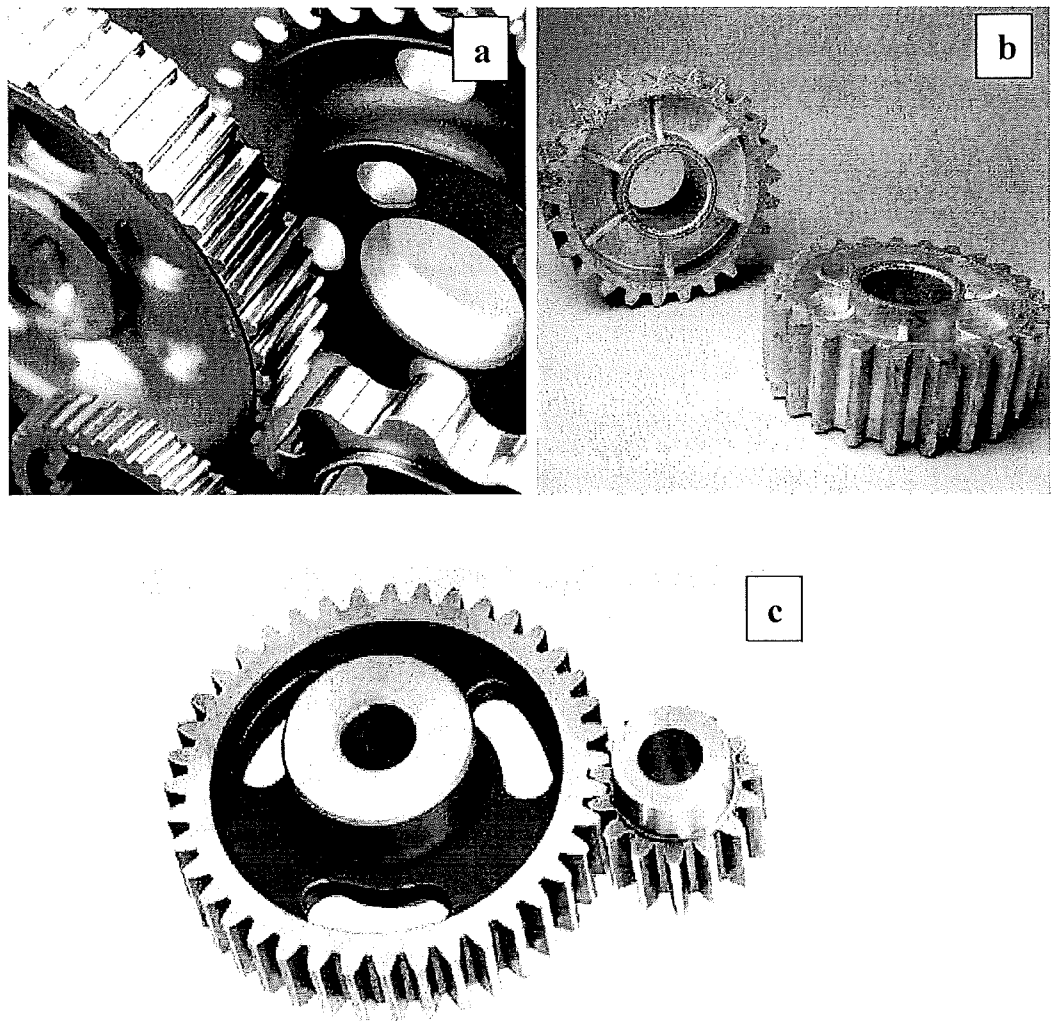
(a) precision sintered automotive transmission gear, (b) zinc die cast steering gear and (c) cold rolled steel spur gear.
